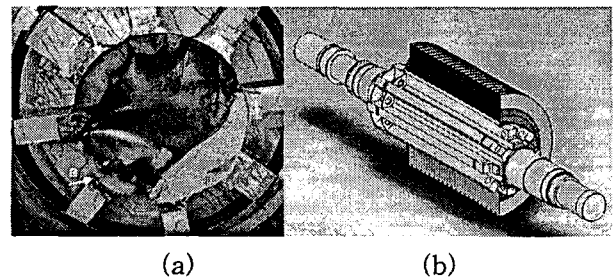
(a) Fatigue failure of genertor shaft, (b) geometry of generator shaft
